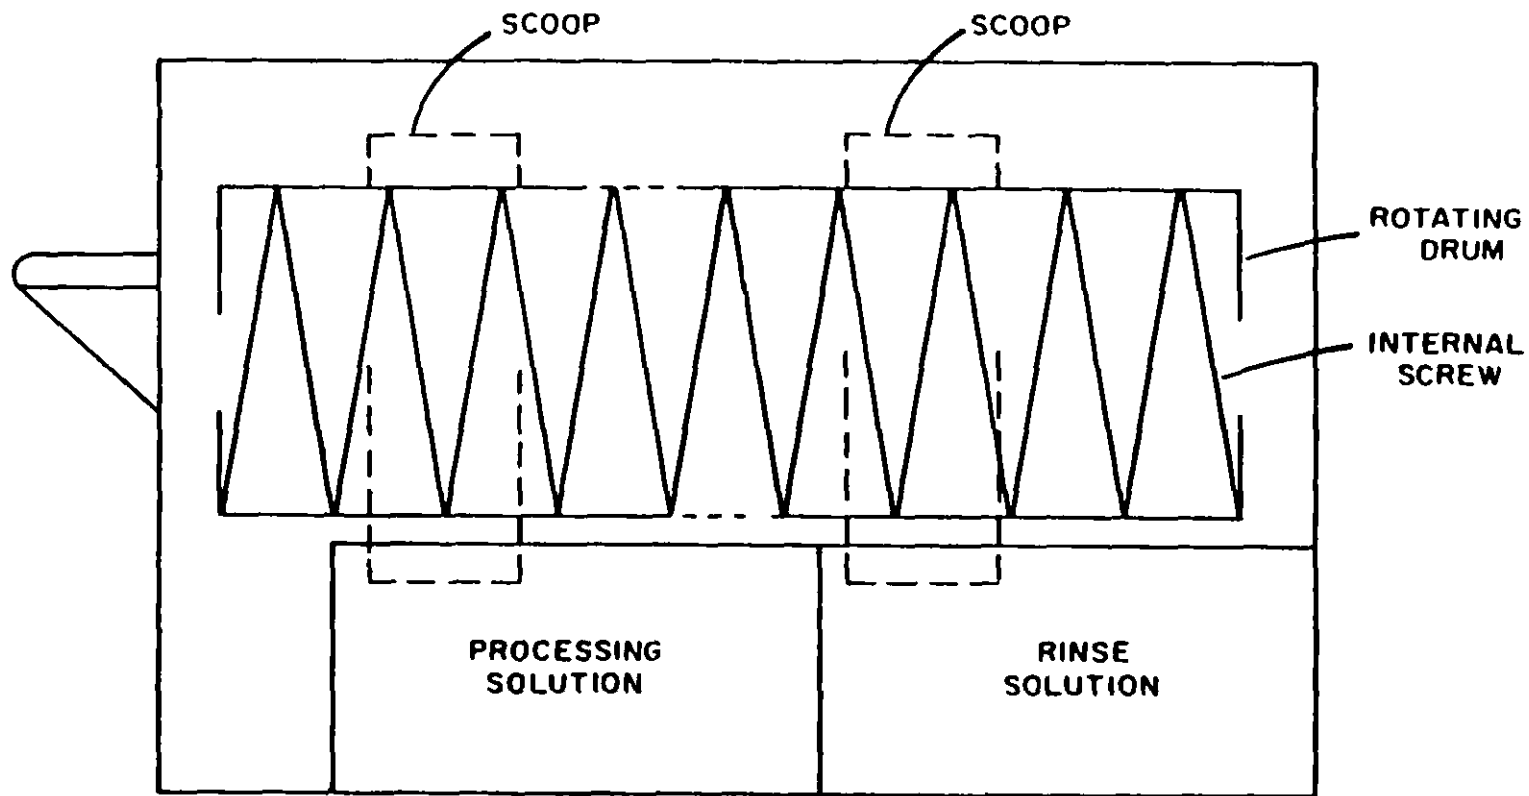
ROTATING DRUM WITH INTERNAL SCREW (SIDE VIEW)
